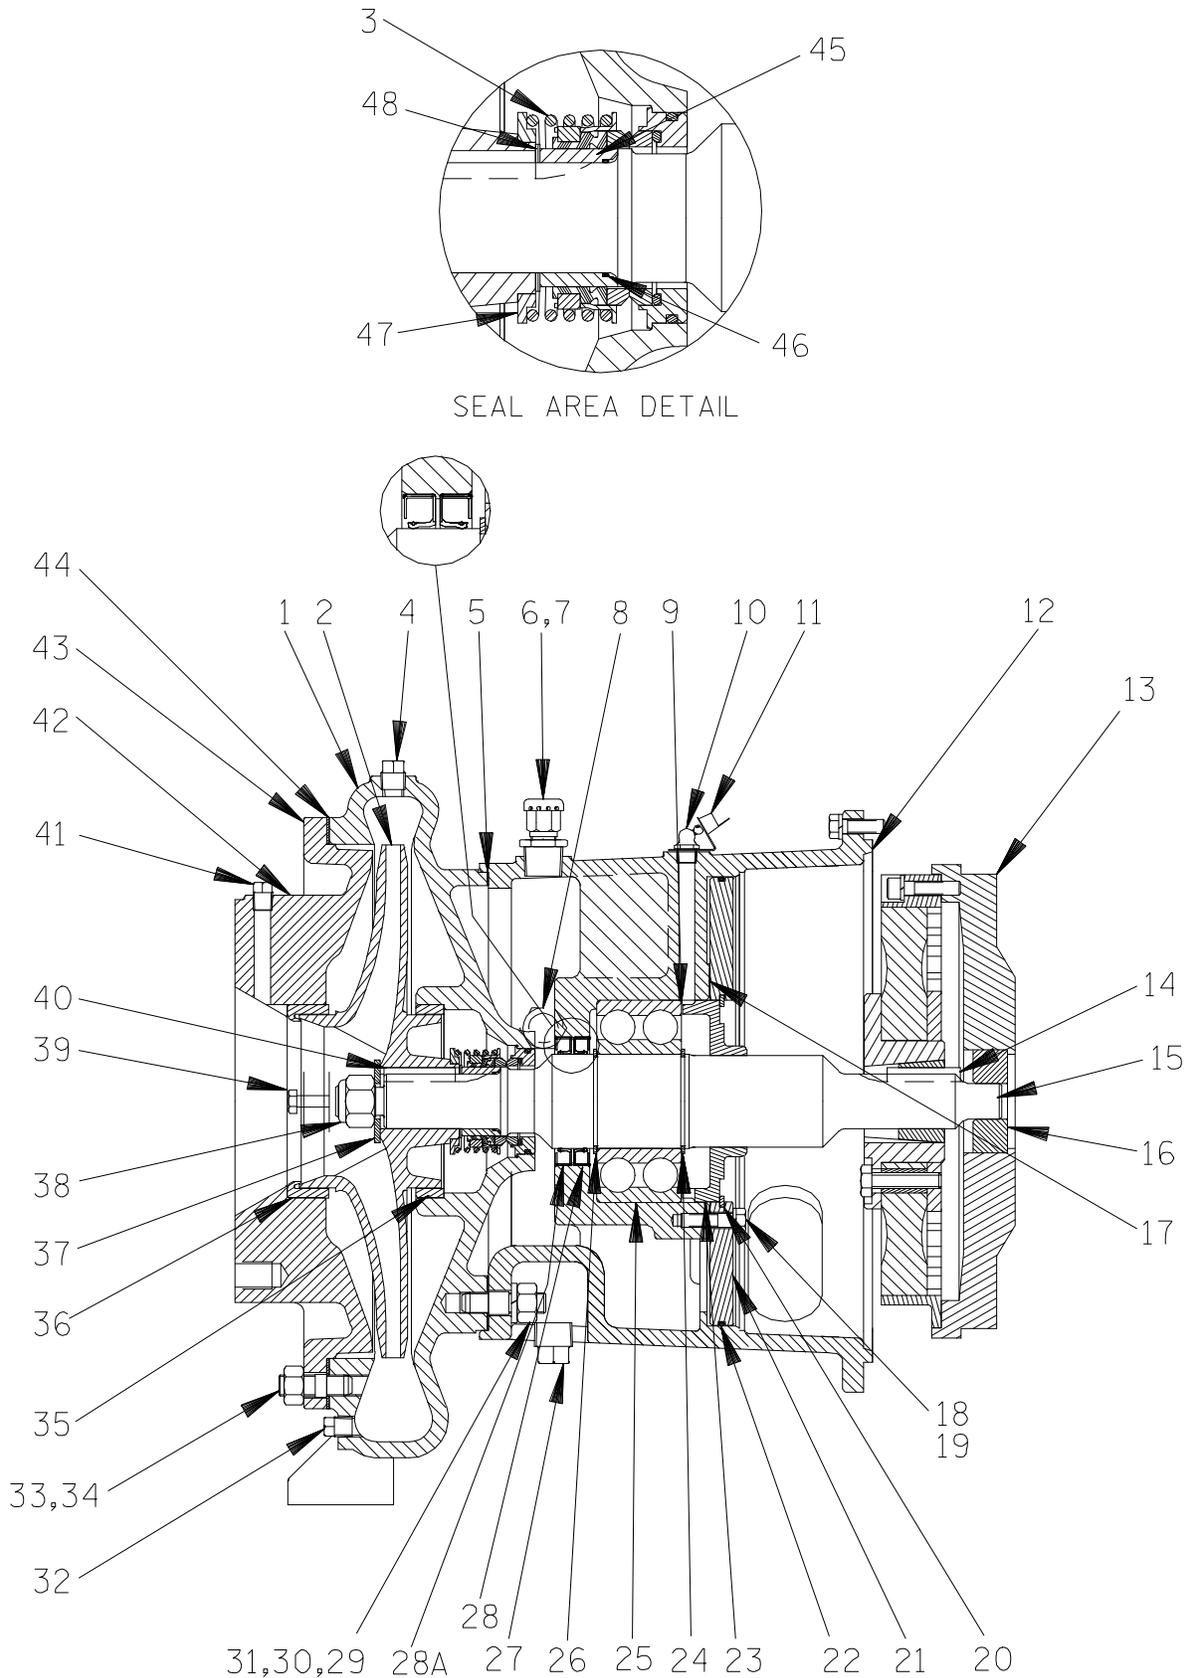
64B60-(SAE 4/10) Pump Assembly
